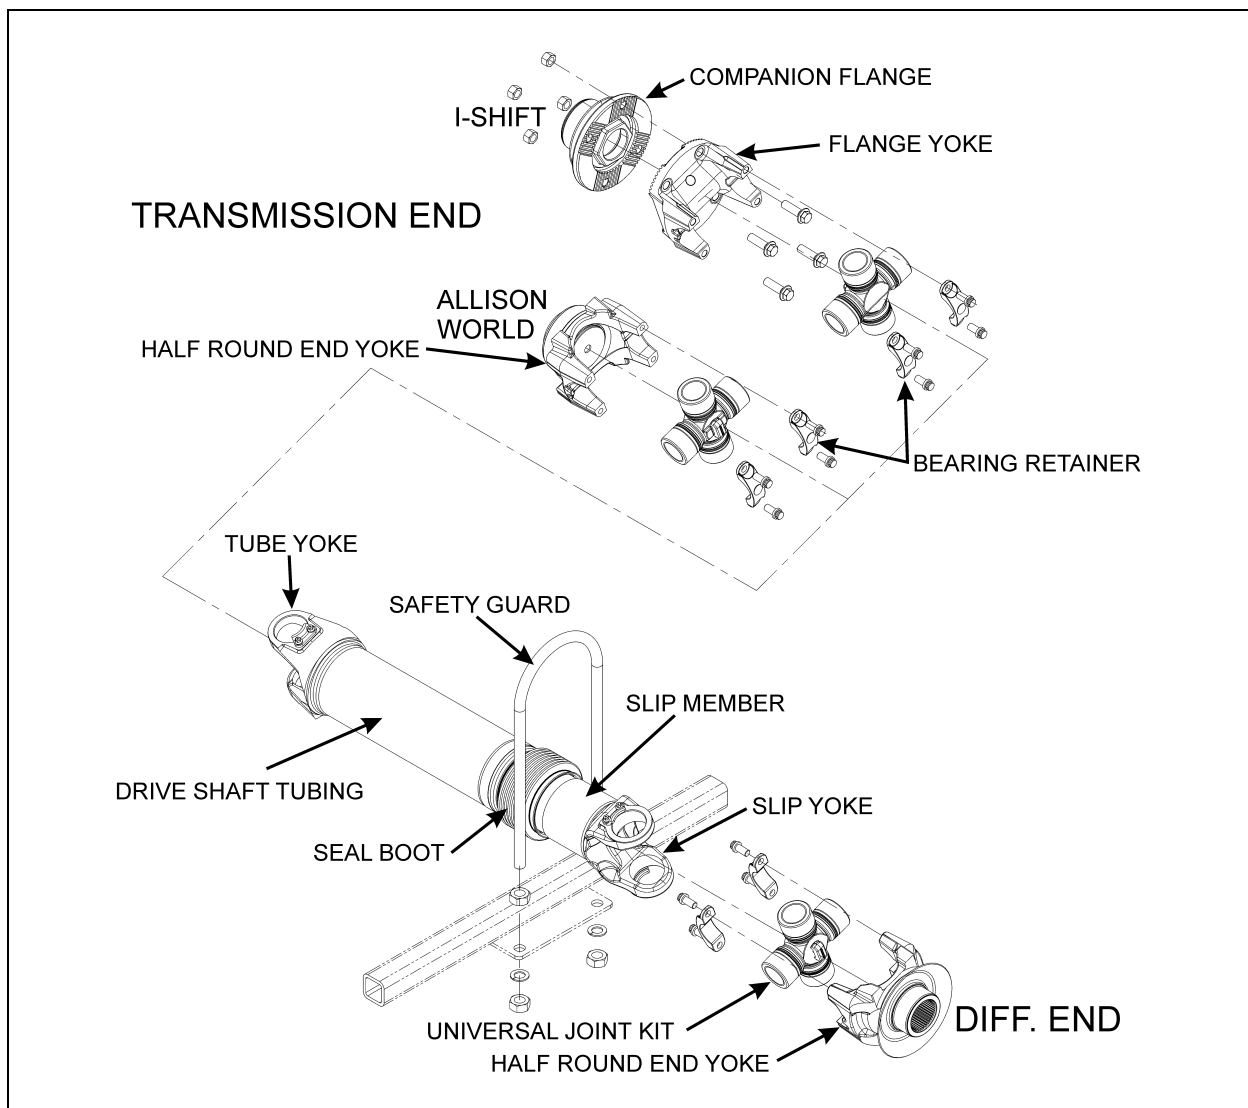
PROPELLER SHAFT ASSEMBLY (TYPICAL)
